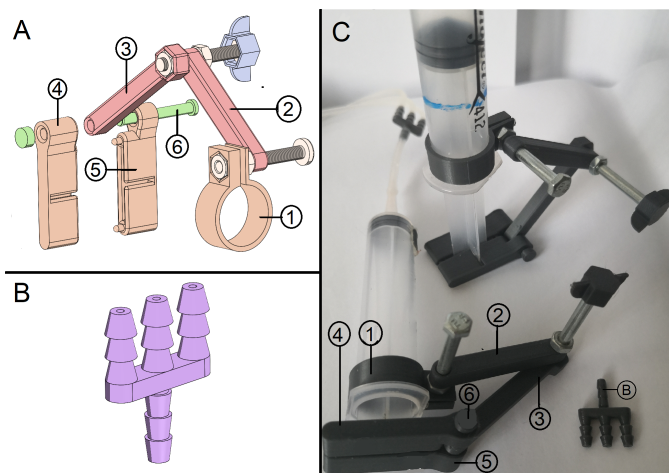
CAD drawing and picture of pneumatic attachments. (A) A CAD drawing of a syringe clamp. The circular clamp (1) is tightened around the syringe chamber with an M4 bolt. This bolt is used as a hinge by a link (2). Another link (3) hosts a nut that allows for the two links to be compressed against each other by tightening the connection. The proximal disk of the syringe piston is locked in between a female (4) and male (5) geometry lock. A pin (6) attached the link to this lock allowing one DOF. (B) A pneumatic fitting with one input and three outputs. (C) A picture of the pneumatic attachment (A) and (B) assembled.
